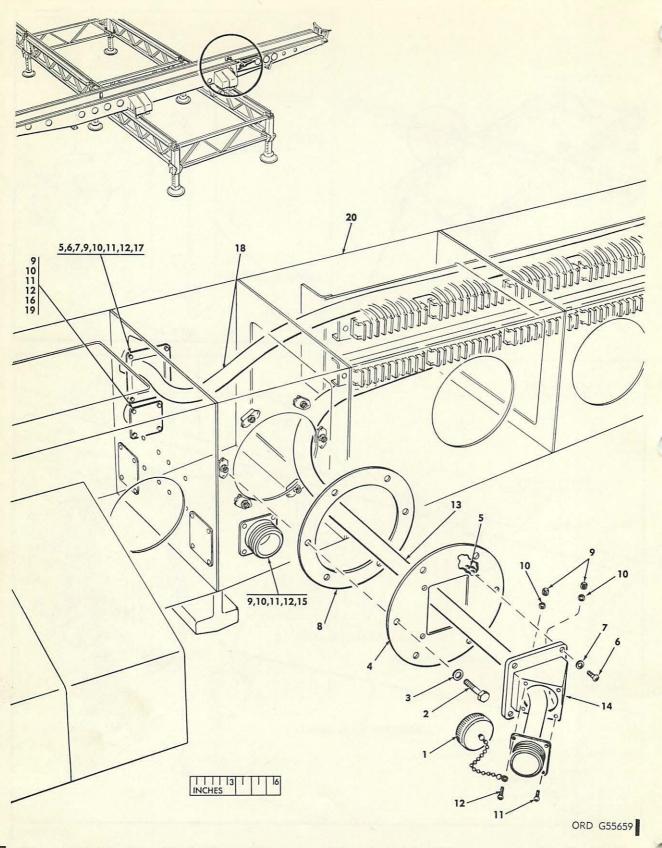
Missile umbilical cable assemblies, cover plate, and conduit outlet covers—removal and installation.
